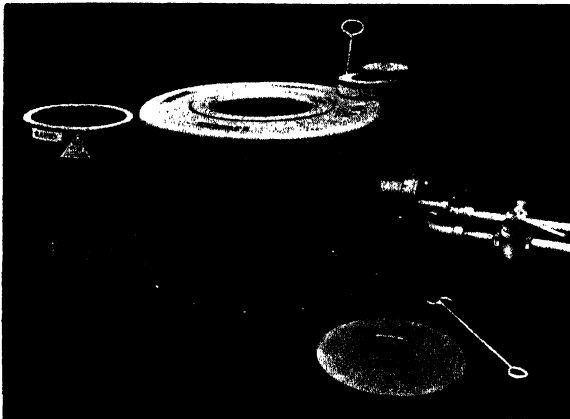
“Bale-Out” Type, Oil-fired Aluminium Melting and Maintaining Furnaces.
